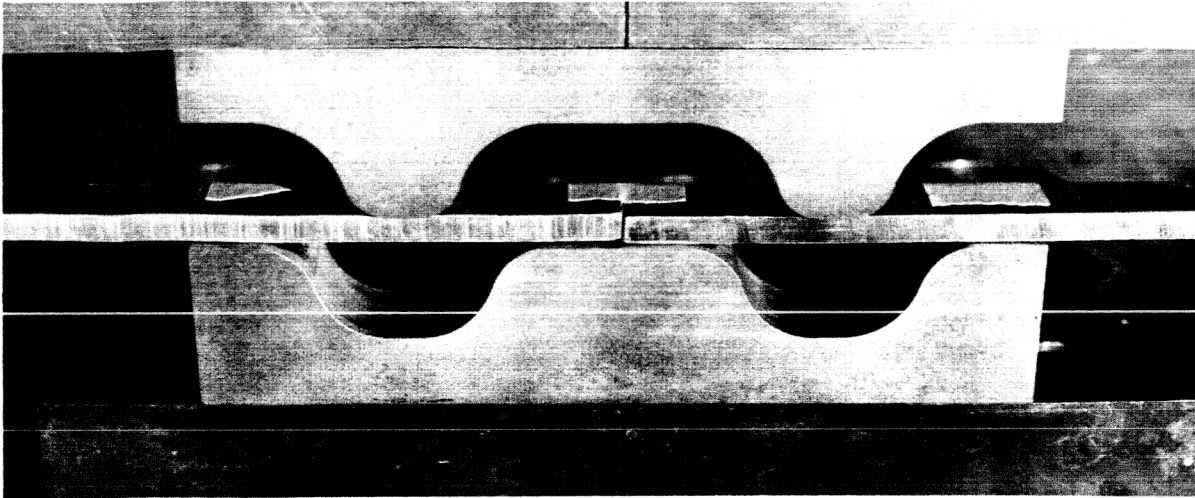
Holding Blanks and Test Specimen before Seating in Edge Clamp Fixture
